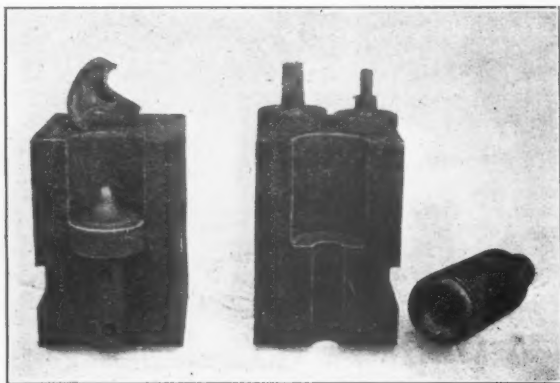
DIES AND HEADER FOR VACUUM RELIEF VALVE.
